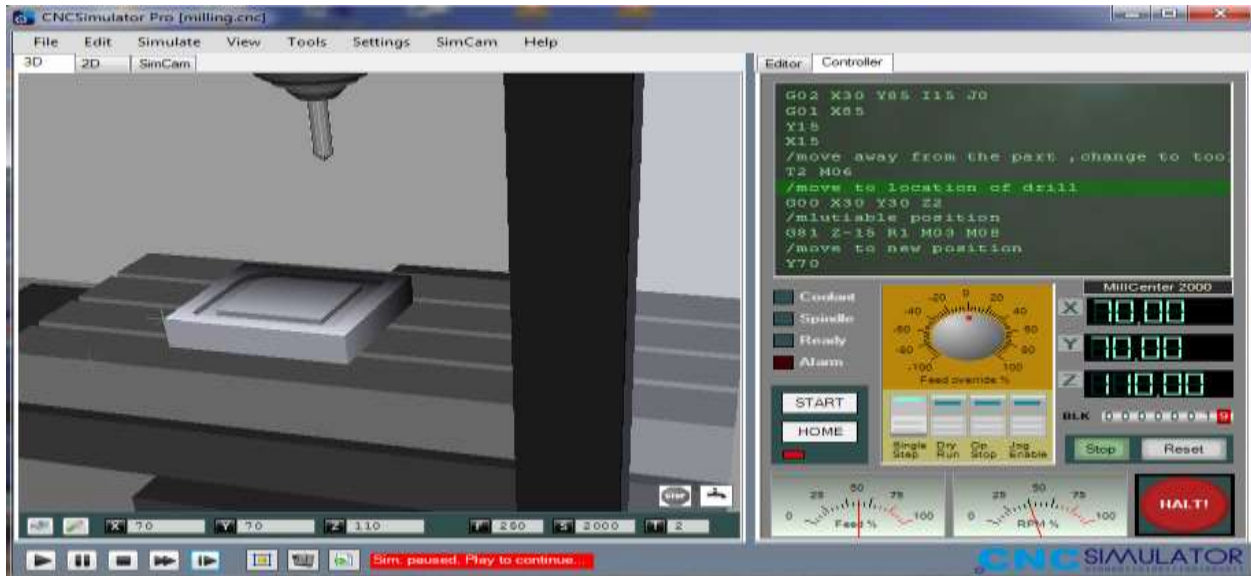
Moving the sample flat mill away from the part and changing the tool to sample pointed drill
